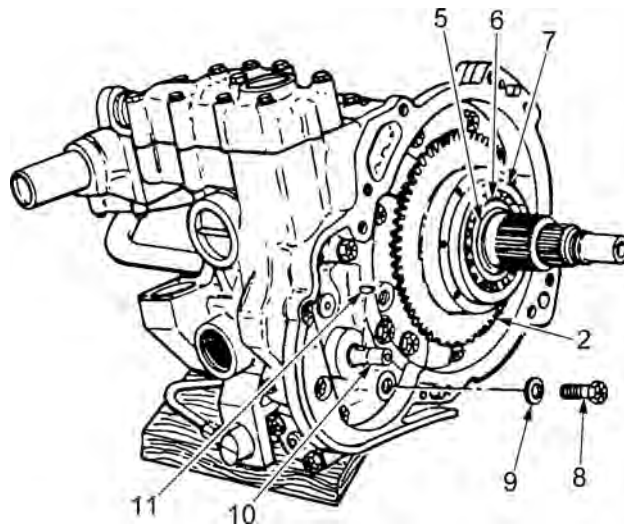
Input Oil Pump Drive Gear and Bearing Removal.
